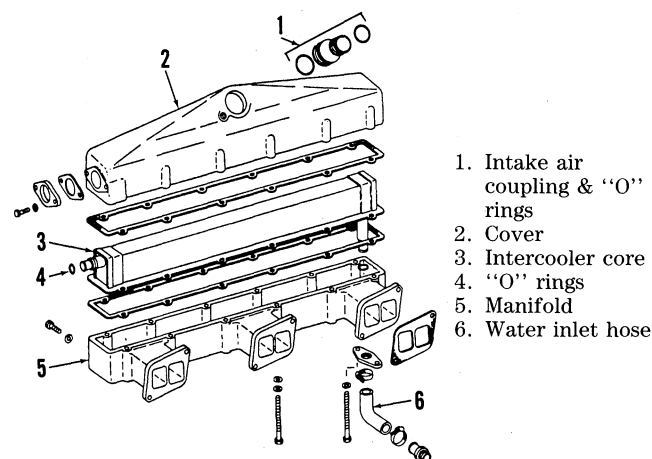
Exploded view of intake manifold and intercooler used on 4650 and 4850 models.
